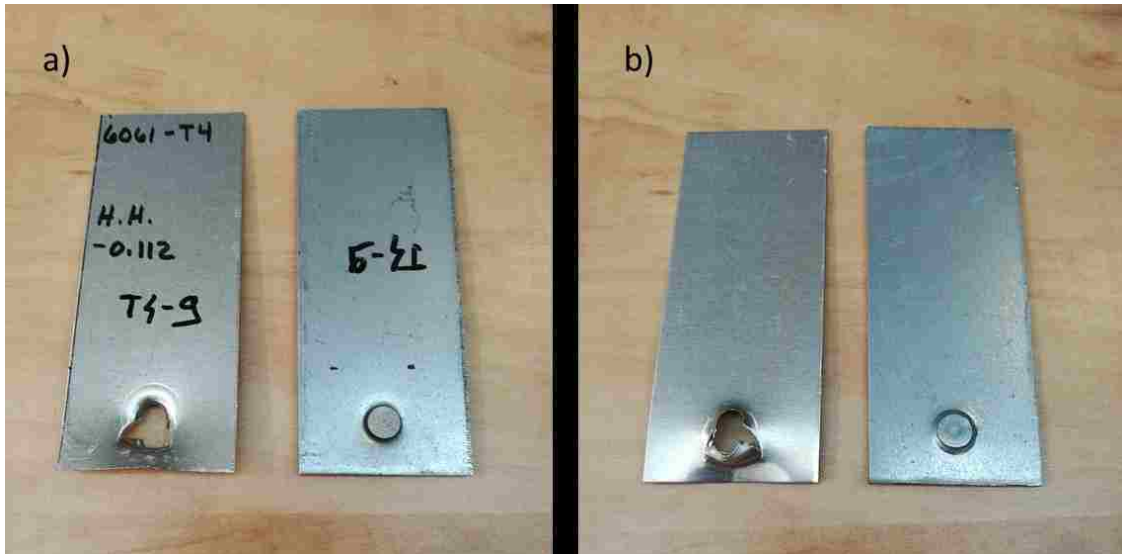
SPR joints after Lap Shear test (Quiet Aluminum® with 6061-T4-O skin in as-received condition and HSLA steel). a) Deformed upper sheet (sandwich) and detached rivet head. b) Back side of the deformed upper sheet (sandwich) and button on the HSLA steel. Severe deformation of the upper sheet was noticed in every specimen tested.
